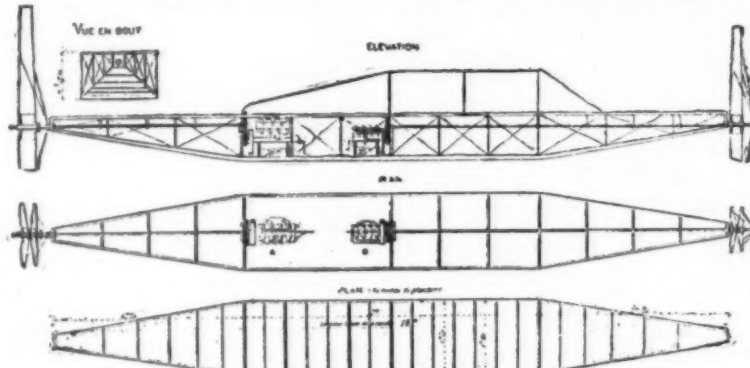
SIDE ELEVATION AND PLAN VIEW OF THE BODY FRAMEWORK OR "NACELLE."
